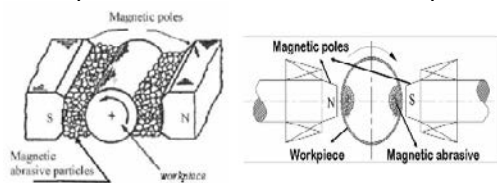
External cylindrical finishing & internal cylindrical finishing
